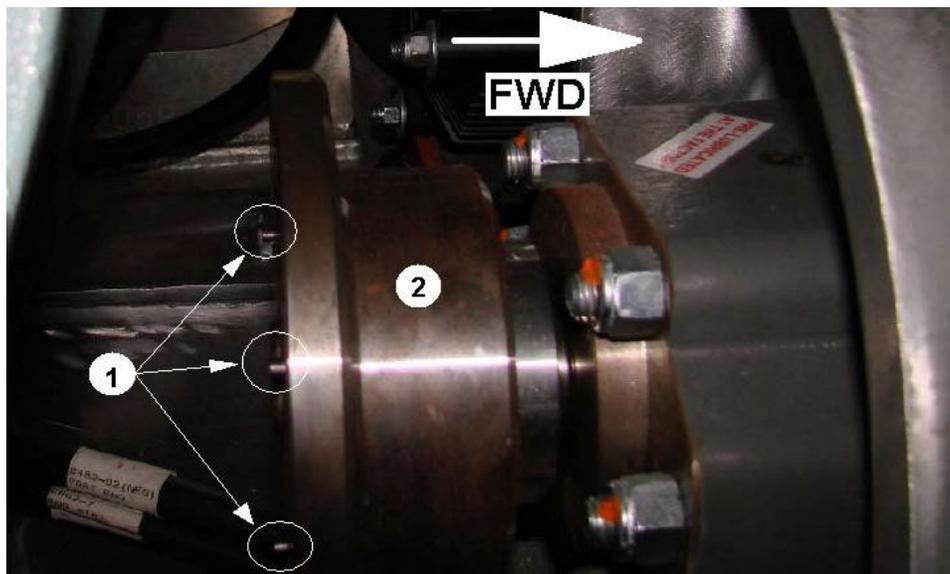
OHLA SHAFT FLANGE ROLL PINS
